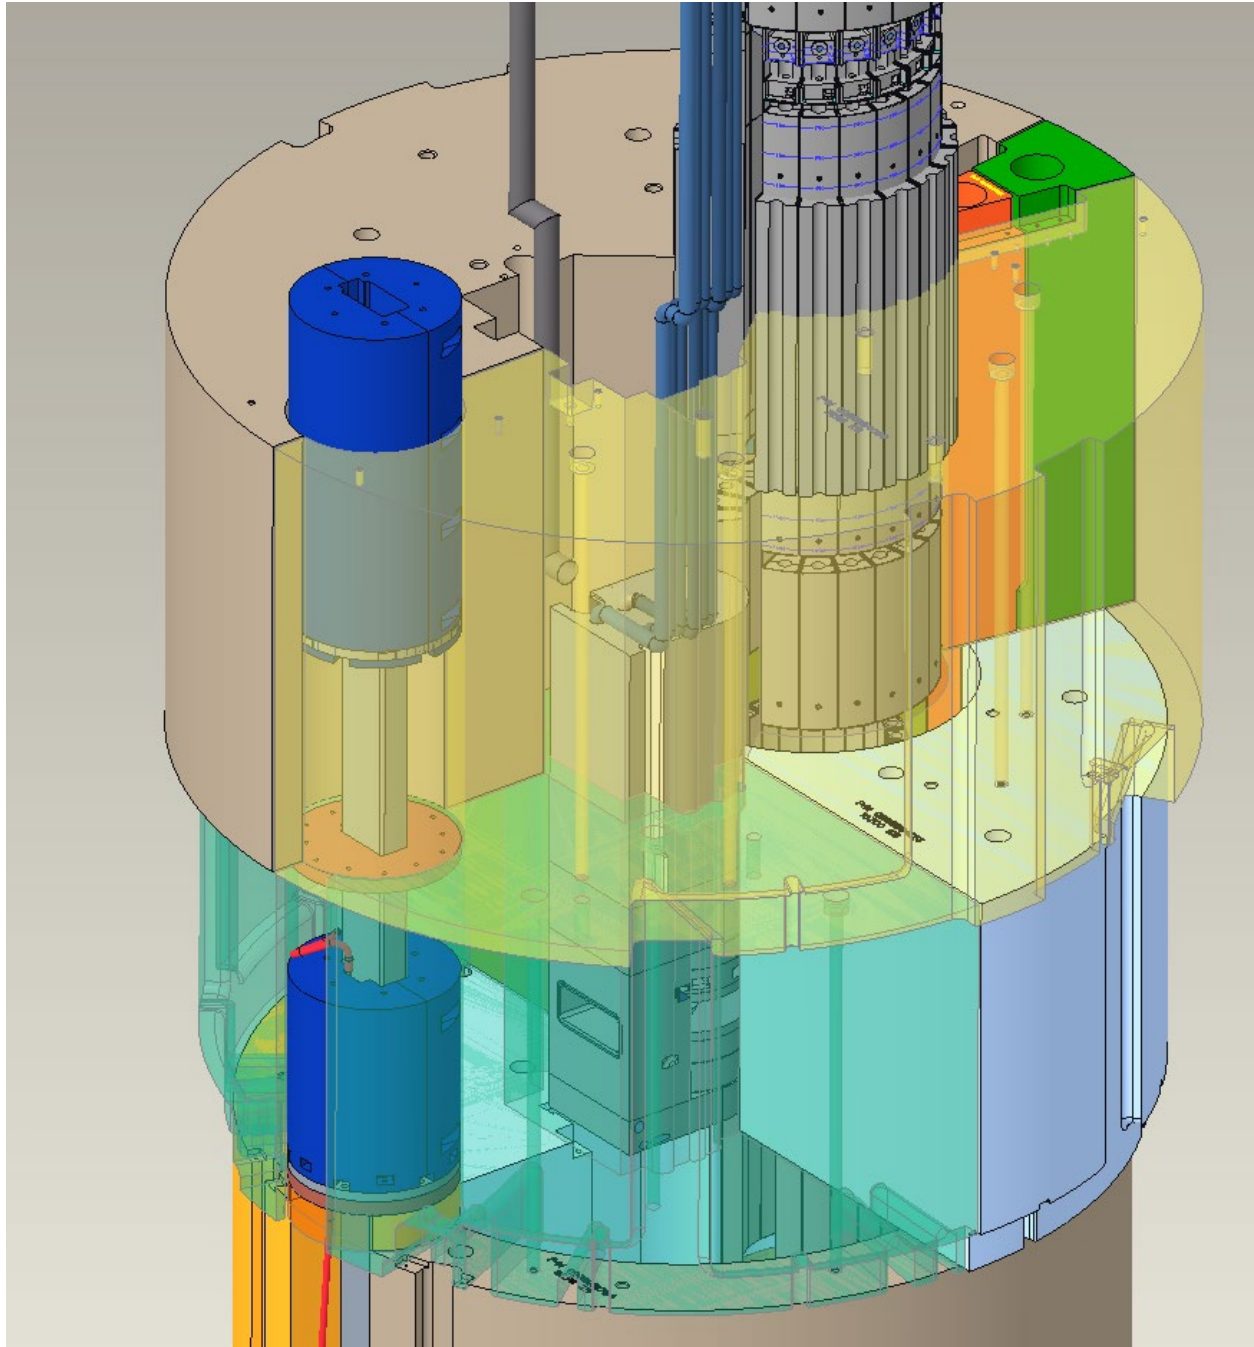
MRA just entering MRA cavity in Core Vessel Shielding with Piping Still Yet to Enter Chases
